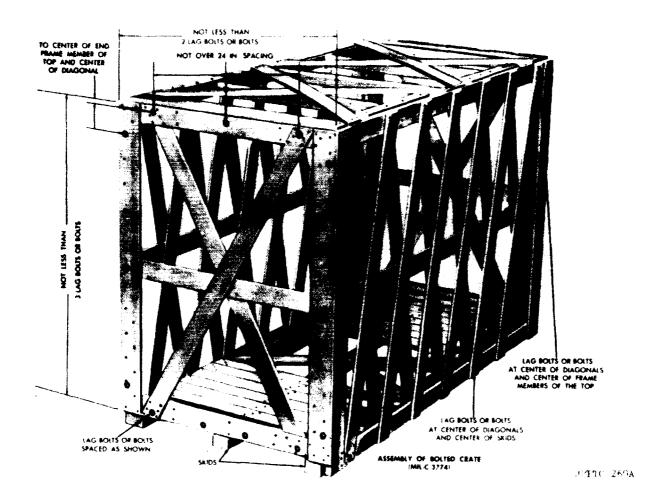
Assembly of Open Bolted Crate (MIL-C-3774).
